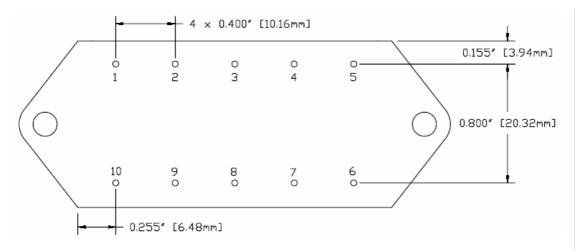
Flanged, Solder Seal Tin Plated Package and Pinout (Not Used for /HB or Higher Screened Products) (Dimensional Limits are ±0.005" Unless Otherwise Stated)
